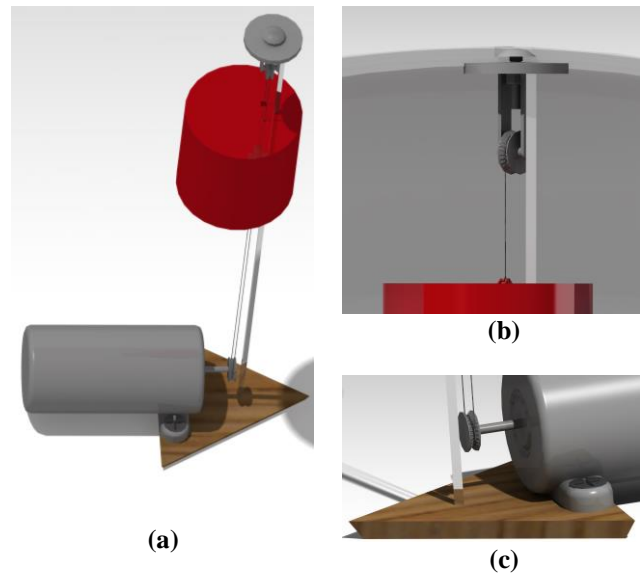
(a) Cable-actuation mechanism (shown for a single spoke), (b) Close-up view of the shell connection, and (c) Close-up view of the motor-pulley system.
